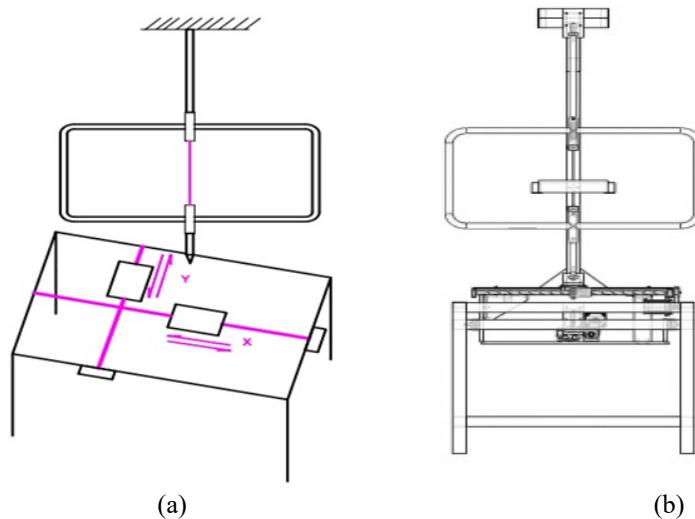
Diagram of vertical mold cutter machine (a) and front view of proposed design (b).
